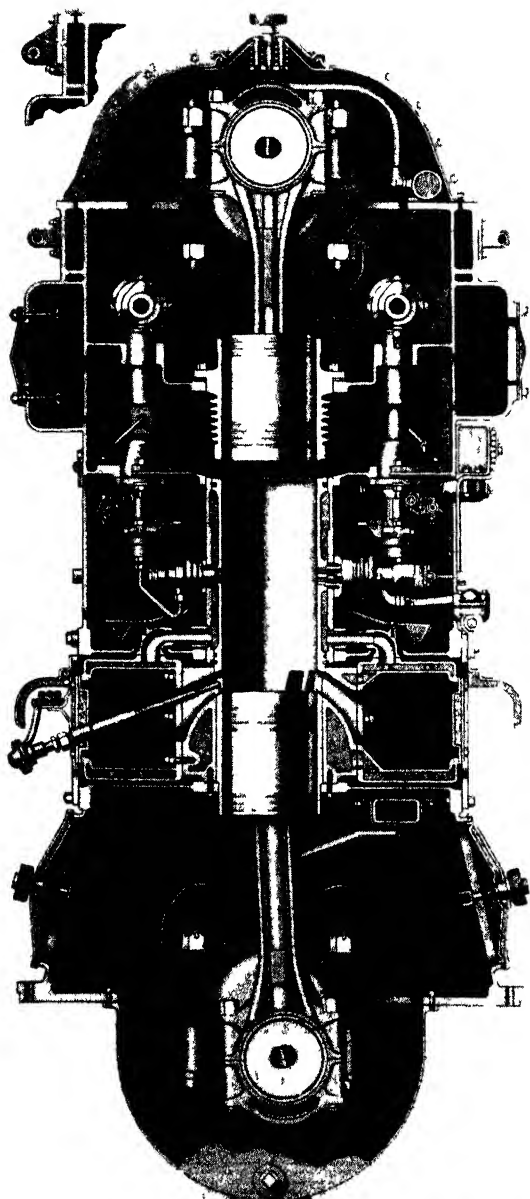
CROSS SECTION OF FAIRBANKS-MORSE LOCOMOTIVE ENGINE.
